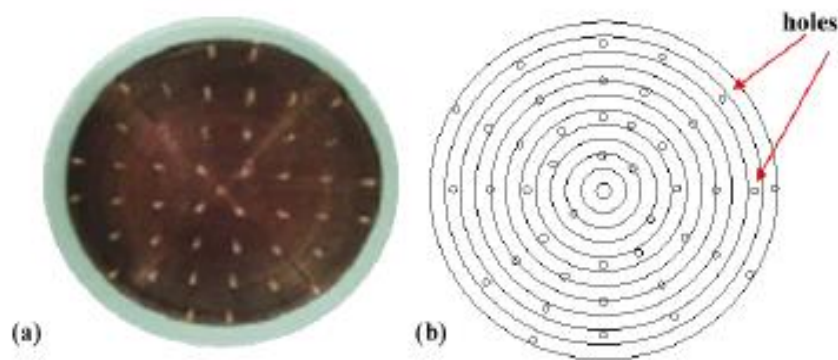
a) The plate with grooves and holes, b) schematic drawing of the base
